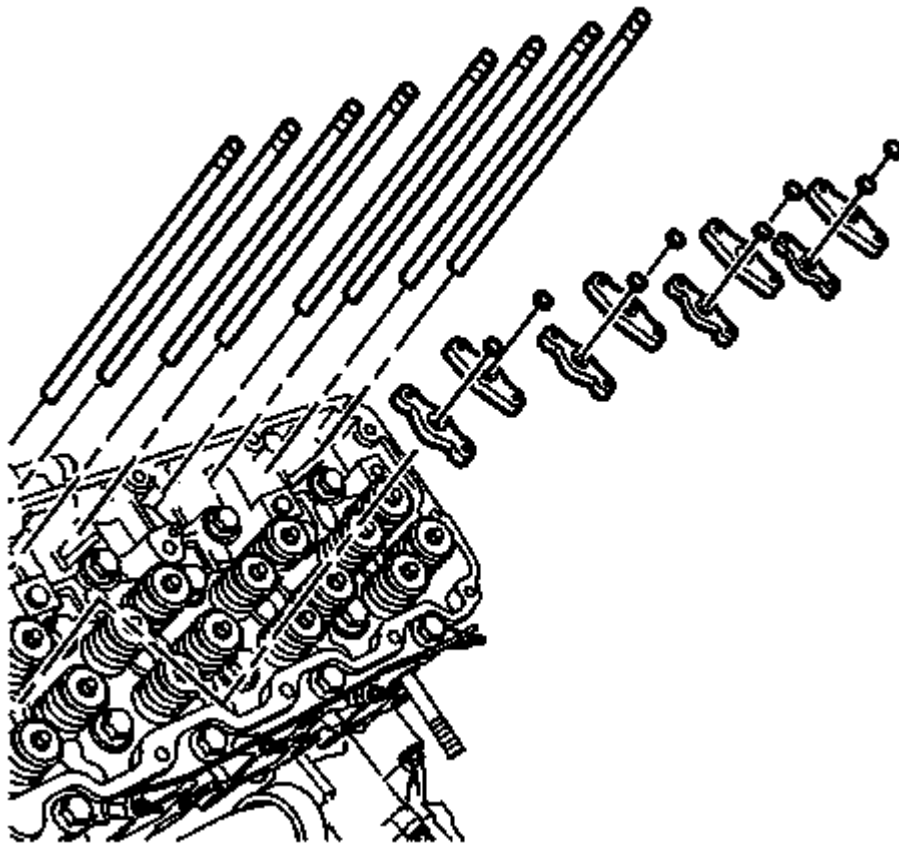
View Of Pushrods, Valve Spring Caps & Valve Lifter Bridges
